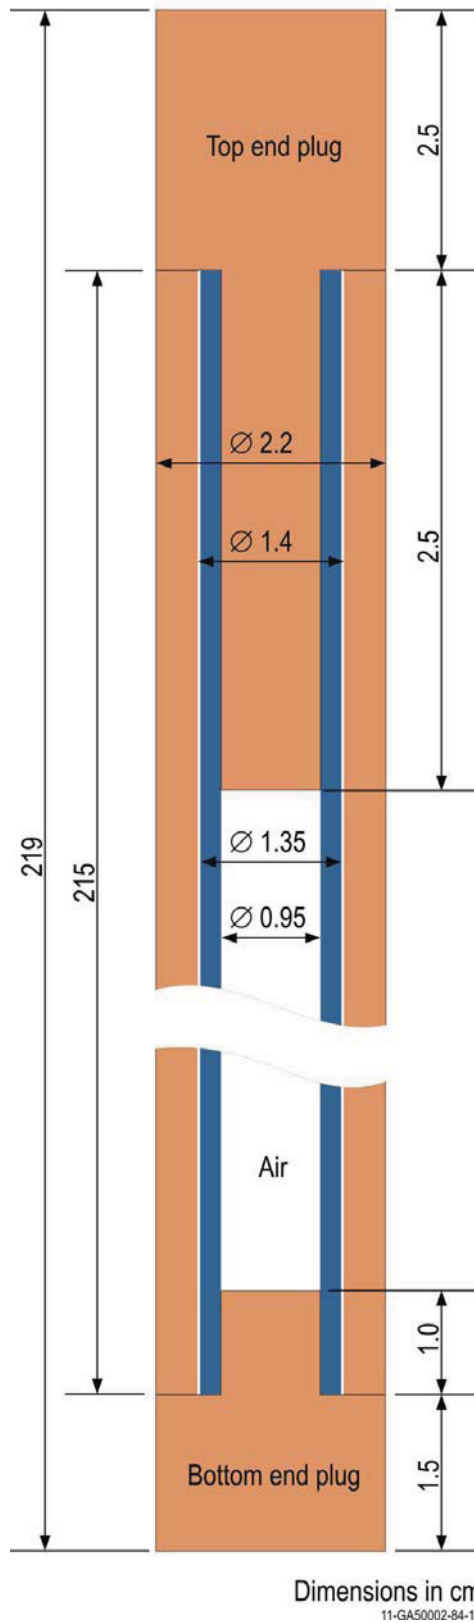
Axial View of Withdrawable Control Rod.
